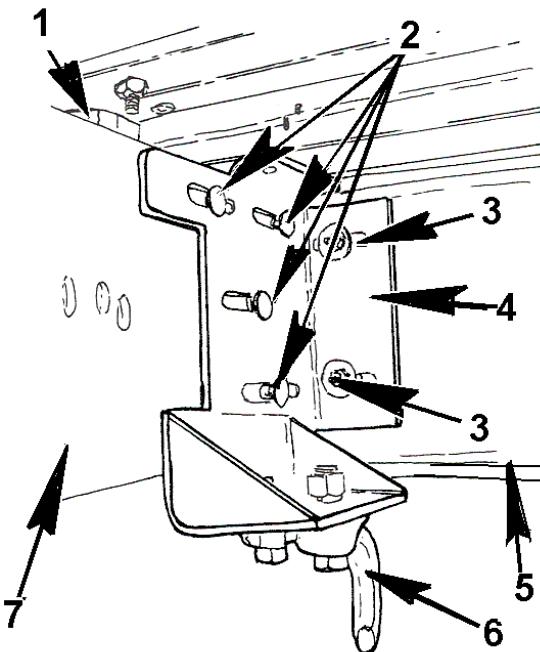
Bumper Mounting Bracket and Bolts with Tow Hook Assembly
